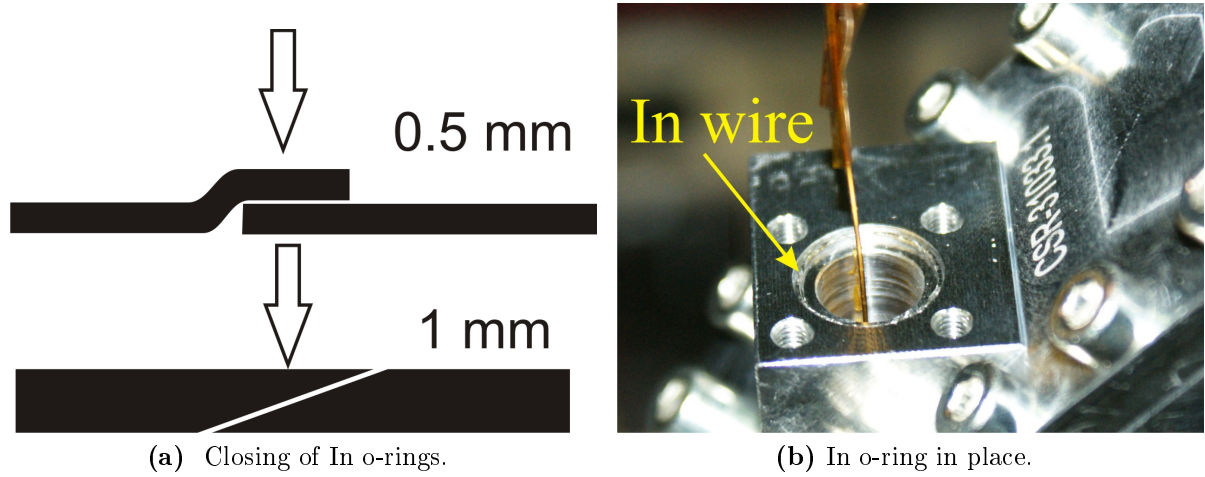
Indium sealing technique. Wire overlap methods used for 0.5 and 1 mm In wires, the arrows show the tightening pressure (left). Indium ring in place to seal the cryogen coupling (right).
